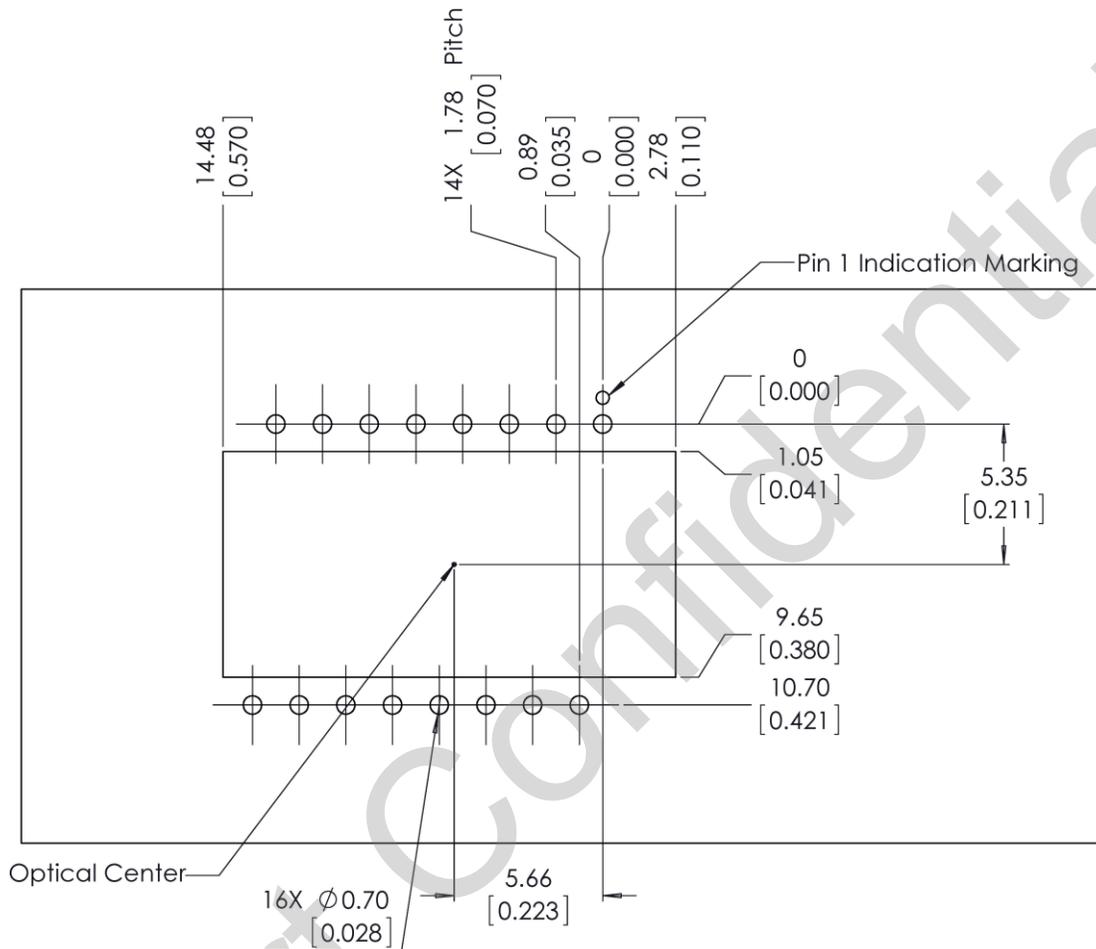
Recommended Chip Orientation, Mechanical Cutouts and Spacing (Top View)
